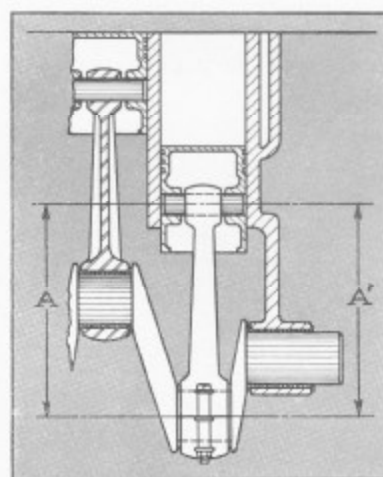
Correctly bored connecting rod holds piston in perfect alignment with cylinder.
